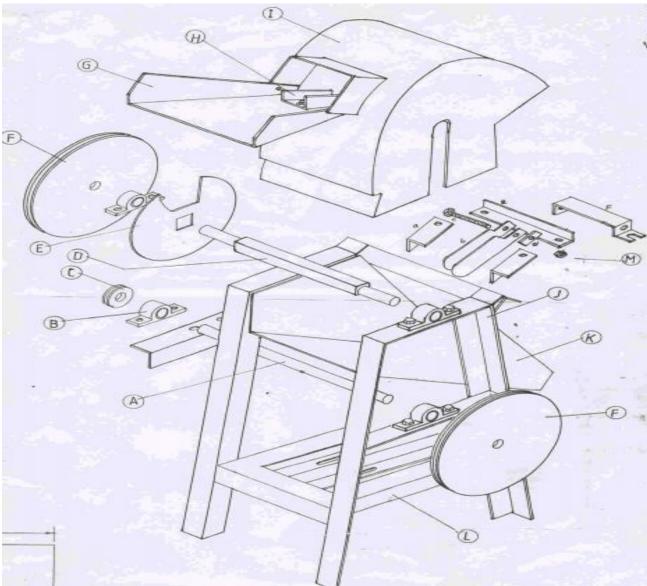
Exploded view of the slicing machine showing the component parts. Legend: A, Idler shaft; B, bearing; C, Motor (driver) pulley; D, shaft; E, conveying disc; F, idler pulley; G, hopper; H, feed channel; I, upper housing; J, frame; K, outlet; L, motor seat; M, slicing unit.
